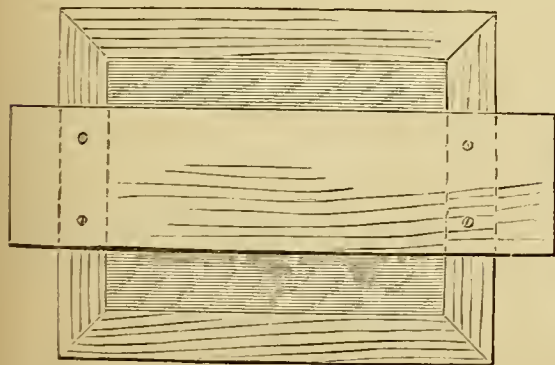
FRAME SECURED TO SINGLE BROAD BATTEN.
